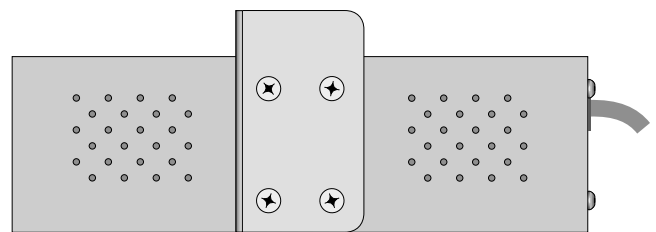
Right side view of Model 734 with center rack mount bracket attached
